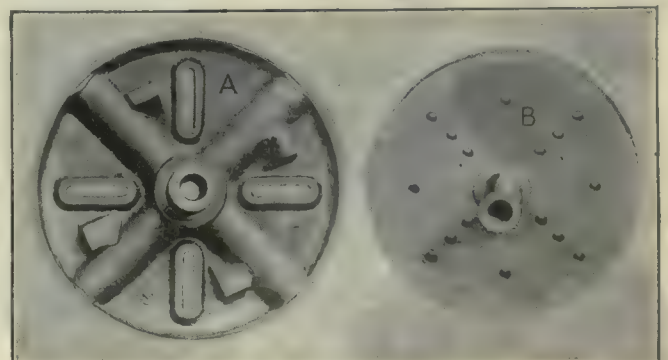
TYPES OF DRILLING-MACHINE TABLES
